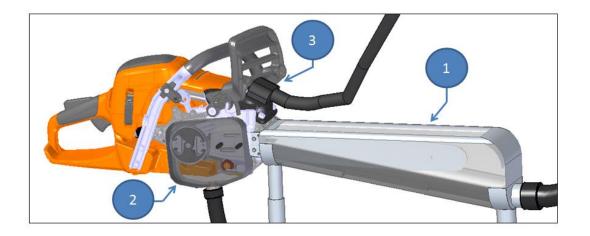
CAD of Three Cover System for Oil and Exhaust Collection. 1) Bar Cover 2) Clutch Cover 3) Exhaust Cover
